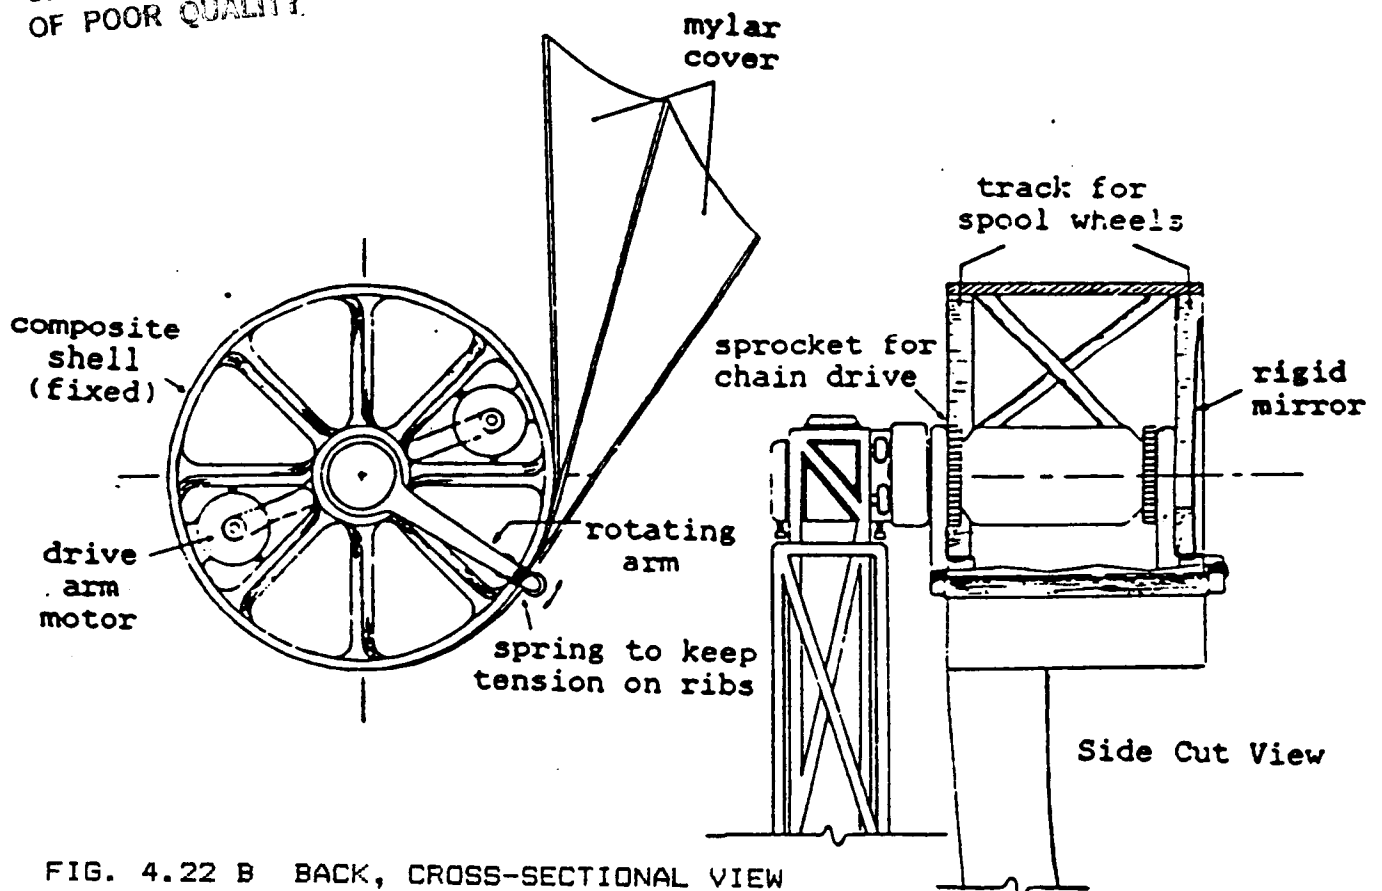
B BACK, CROSS-SECTIONAL VIEW
